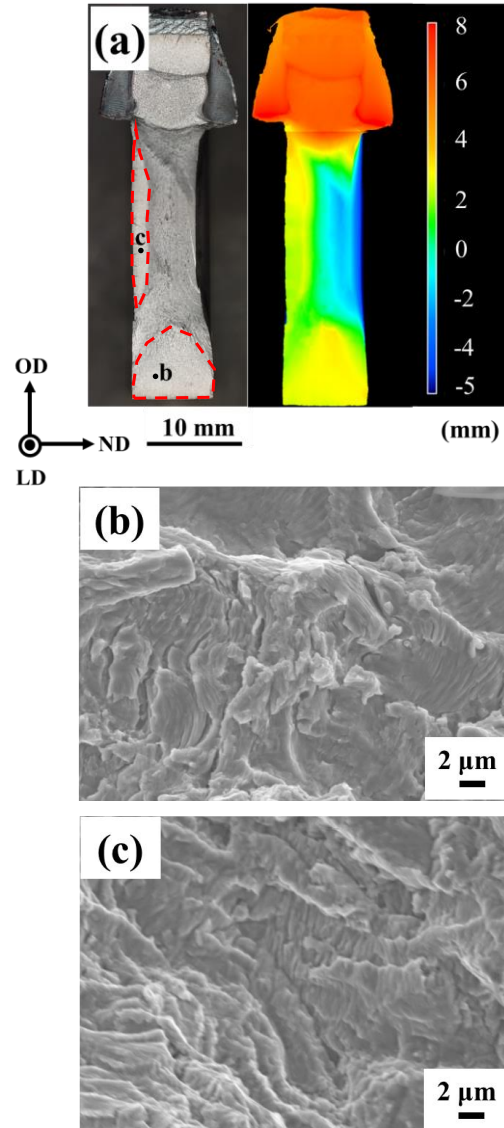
Fractured surface morphology of 50→300MPa joint after fatigue test: (a) Fracture surfaces and height distribution of joint; (b)-(c) SEM observation of fracture surface ($\Delta\sigma = 380$ MPa, $N_f = 127,202$, Red dotted line illustrated the fatigue fracture surface with striation).
